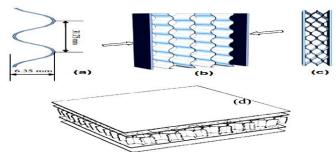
(a) Corrugated core sheet dimension; (b) Assembly procedure [7]; (c) Final sandwich panel;(d) Honeycomb sandwich structure [9].
